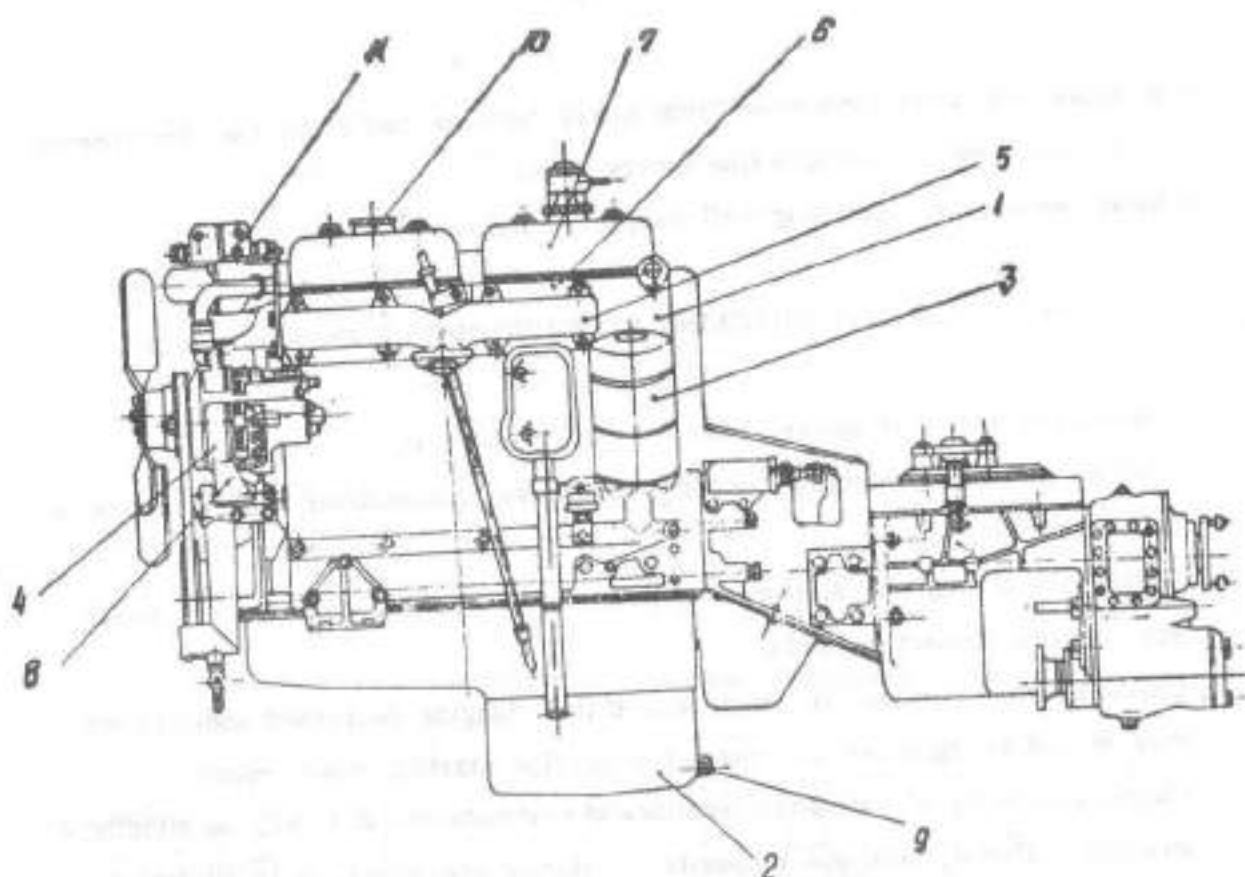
ARO D-127 DIESEL ENGINE SIDE VIEW
